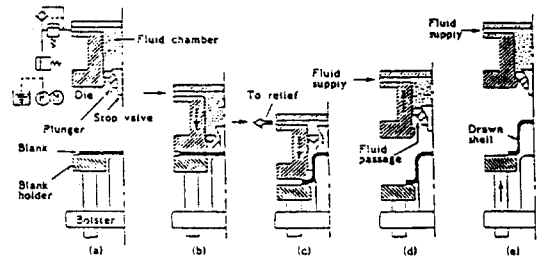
Schematic drawing procedure with the simplified counter-pressure drawing method using an inverted chamber : (a) ready to move down (chamber filled with liquid); (b) clamping of the blank and opening of the valve; (c) drawn stage (with the passage open); (d) ram retracted and valve closed; (e) ejection of the shell.
